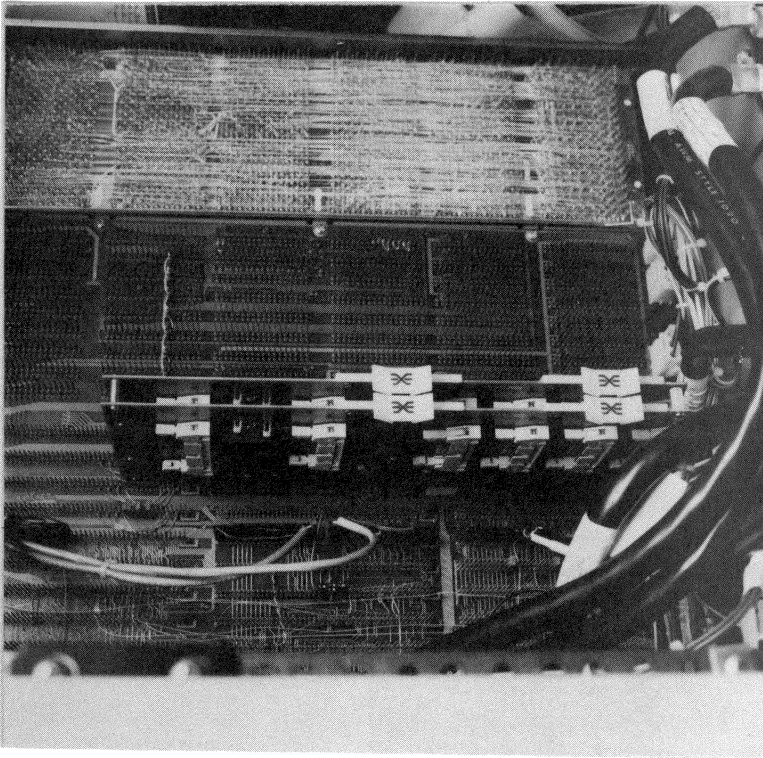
Single and Dual Cable Paddleboard PCBA Installation Details
